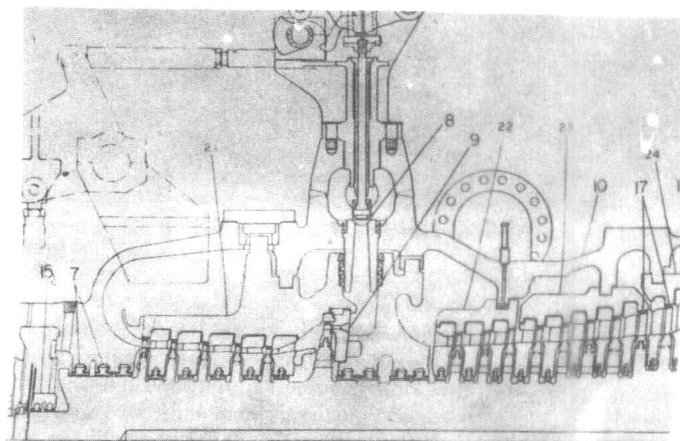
Cross Section Through High Pressure Section of Turbine Illustrating Control Valve Chest Welds and General Internal Geometry of Turbine Casings.
